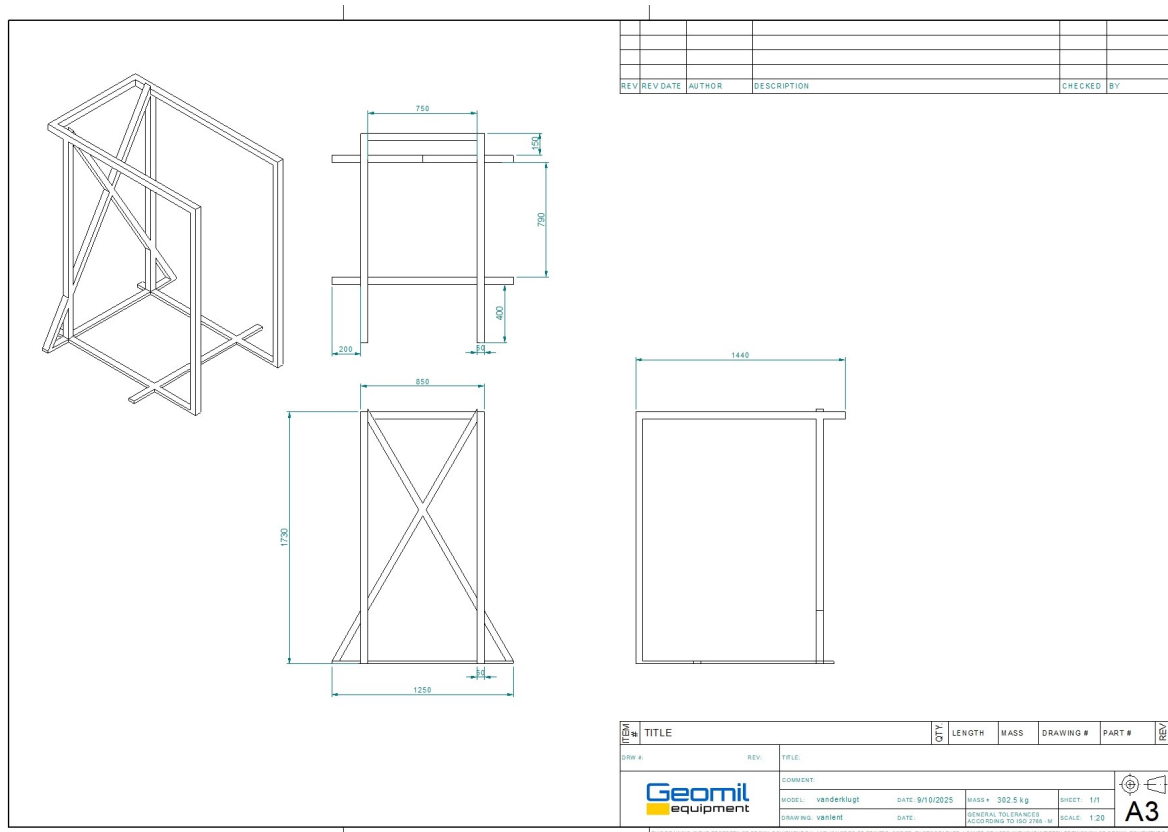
Technical Drawing Of The Rail Gantry Frame.
